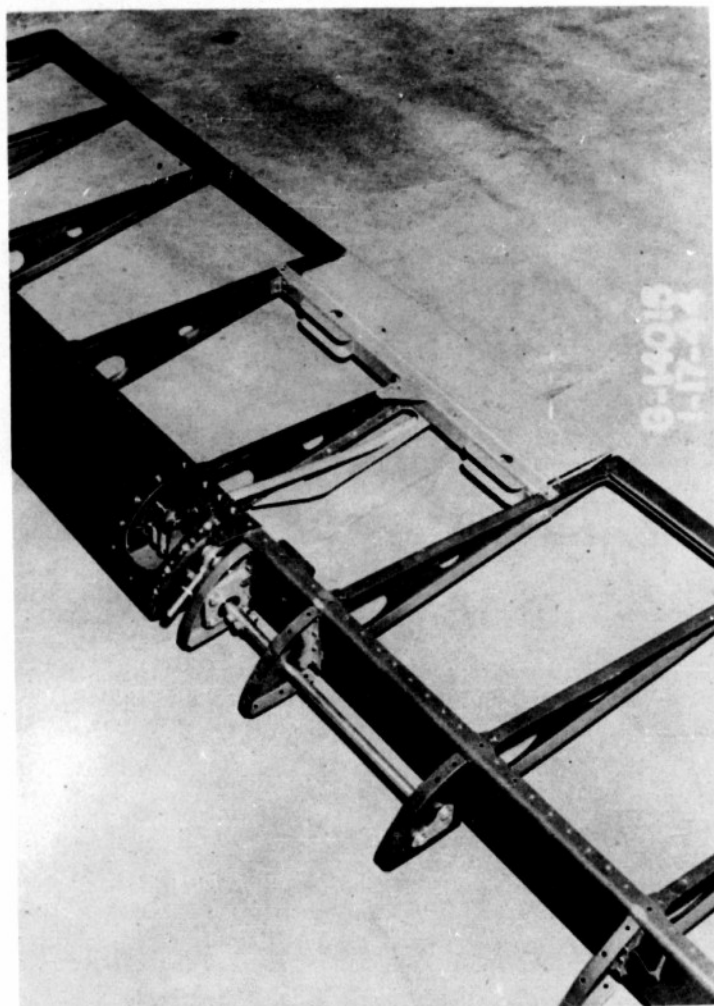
Detail view of right spring-tab aileron. F6F-3 airplane.
